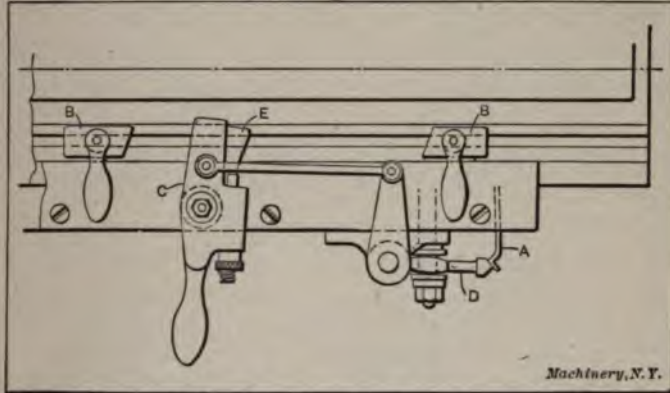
Spring Locking Arrangement for the Shaper-reversing Mechanism
